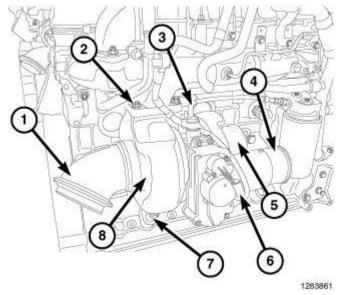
Turbocharger Components Courtesy of CHRYSLER GROUP, LLC
